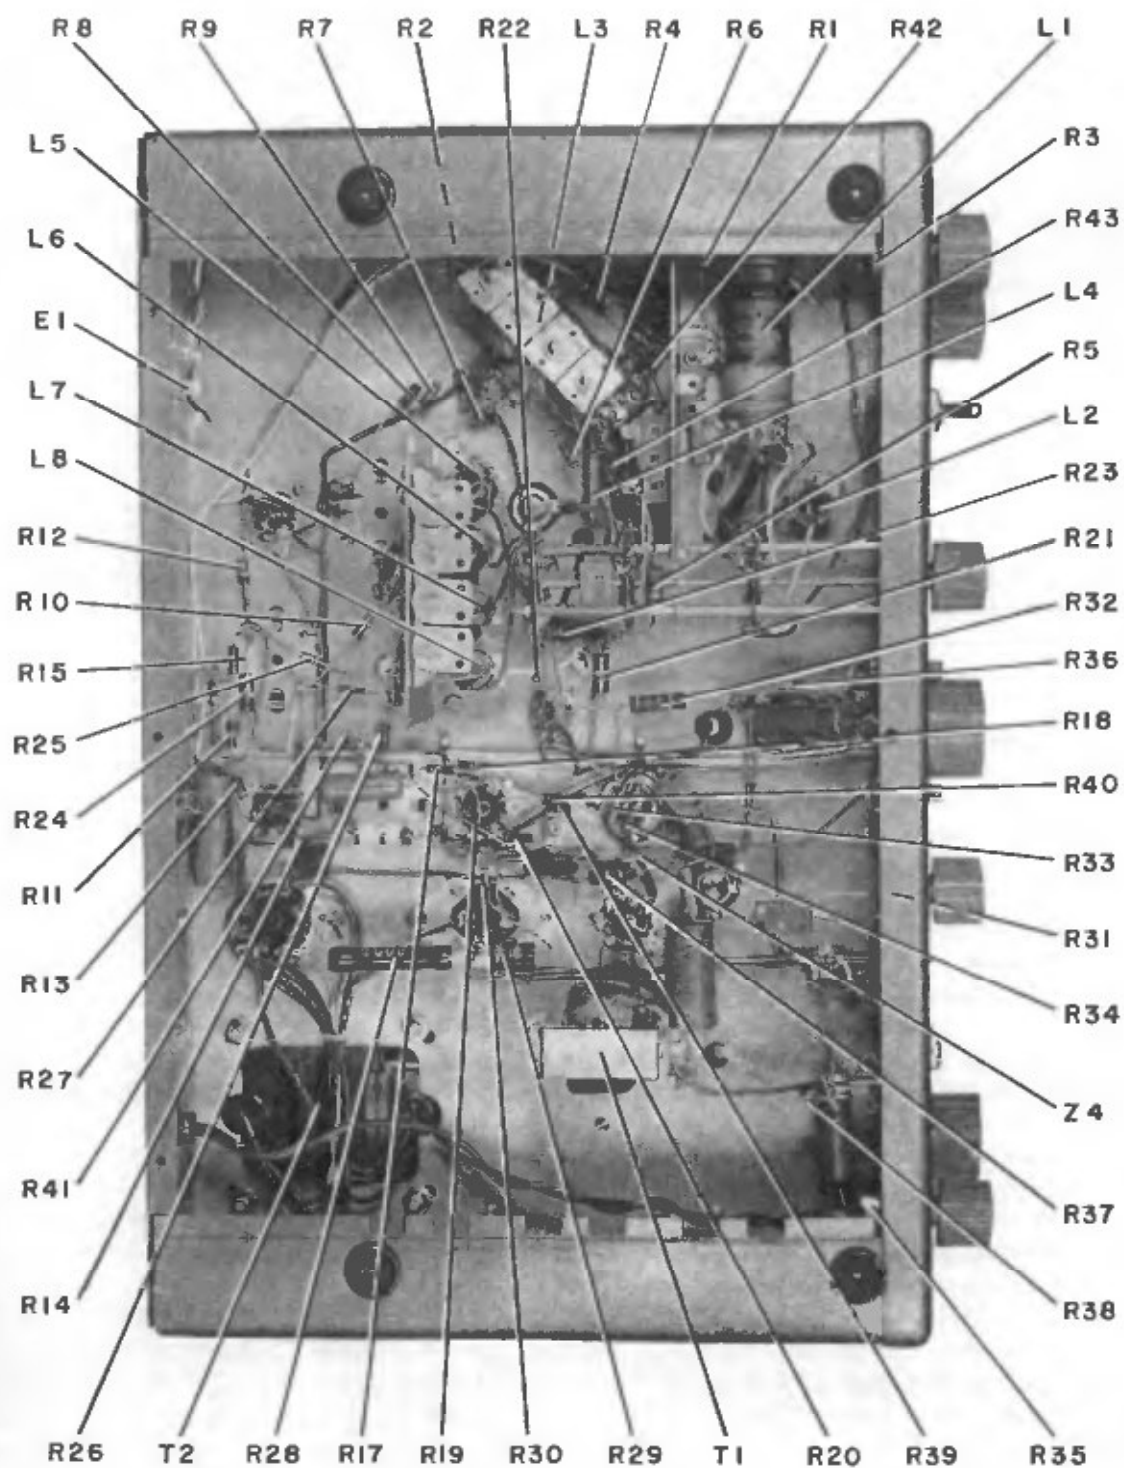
Resistor and Miscellaneous Component Locations, Bottom View of Receiver
